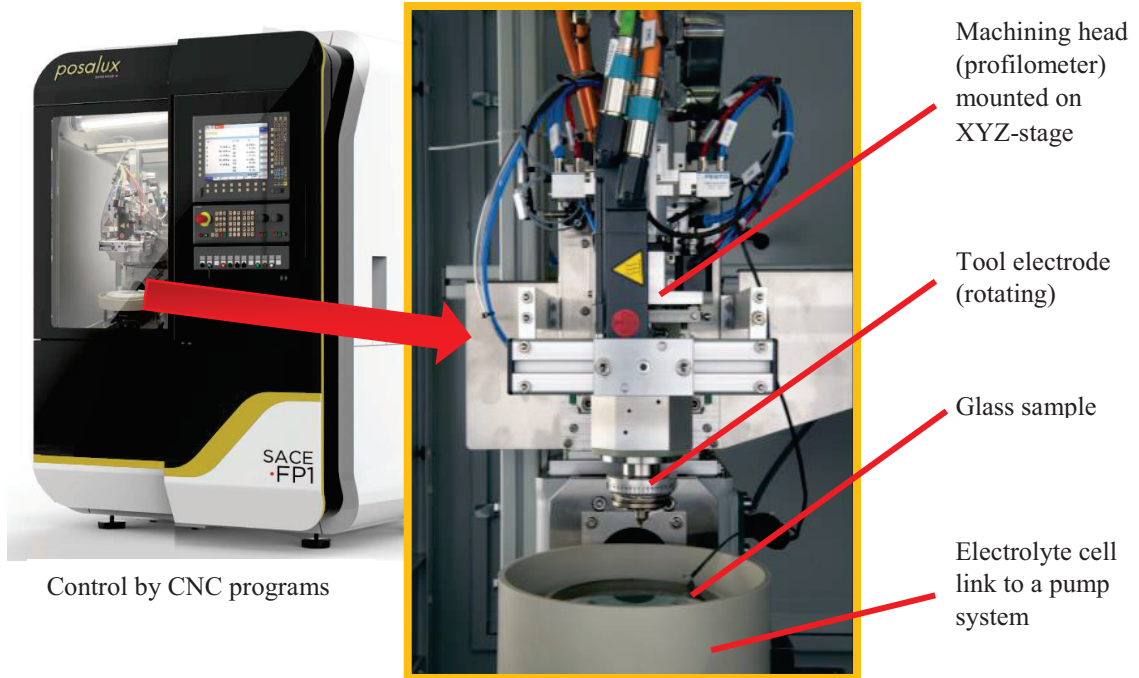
Picture of the Posalux SA commercial SACE machine with a quick description of the machining head.
